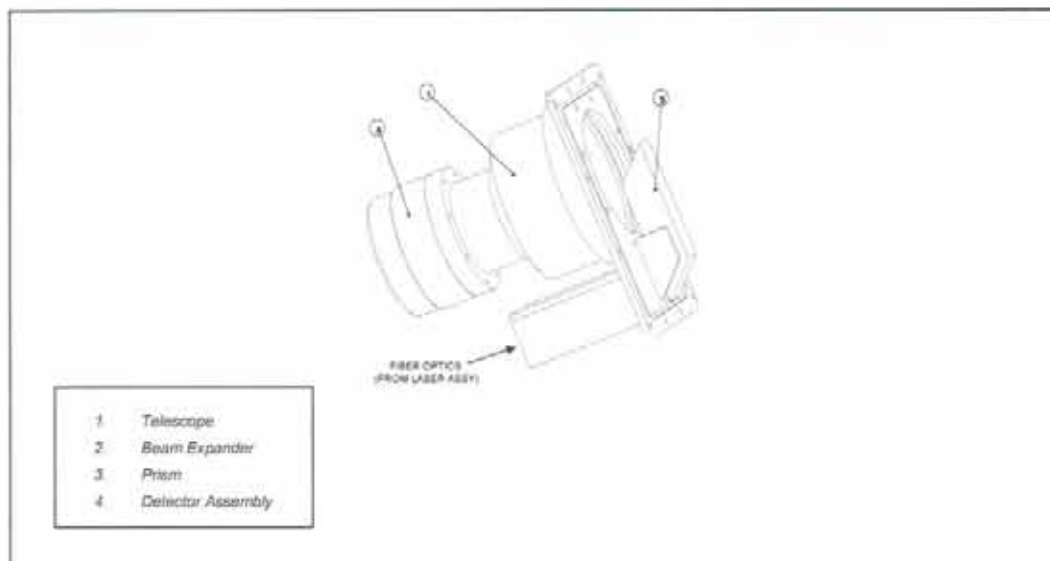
LOAS TX/RX optics assembly and detector assembly.
